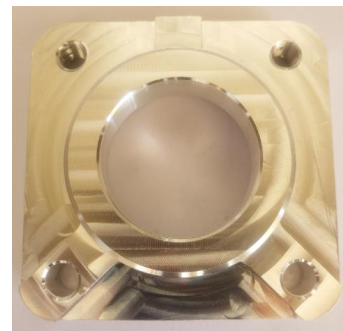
Physical drawing of the machined bearing pedestal - front side
